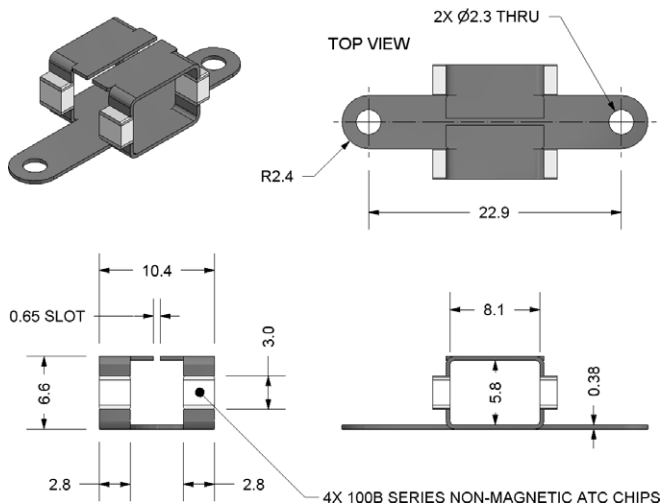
Physical dimensions of the inner <sup>19</sup>F flat sample resonator, in millimeters.
